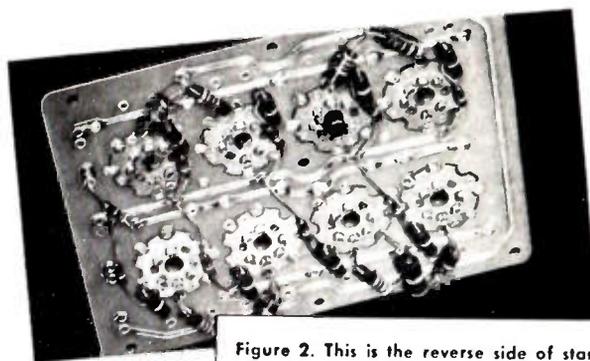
This is the reverse side of stamped circuit shown in figure 1. Both sides of the circuit were stamped in one operation.
